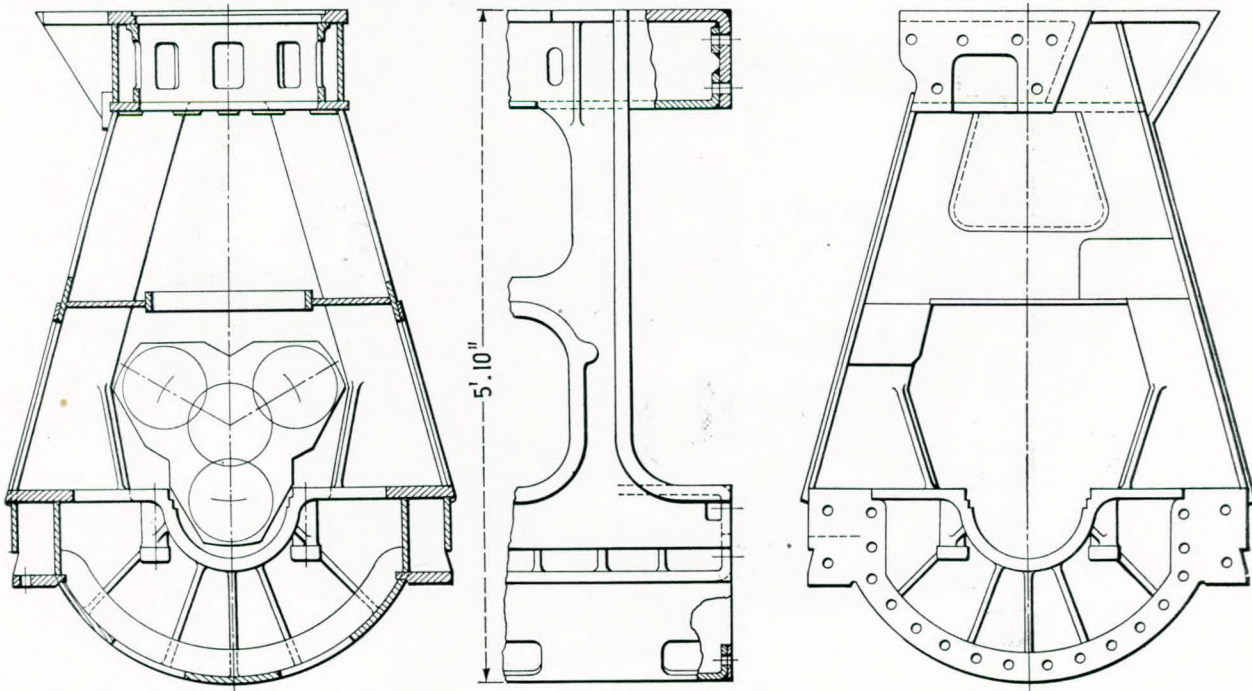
Partial front elevation and end elevation of complete sling frame design.
